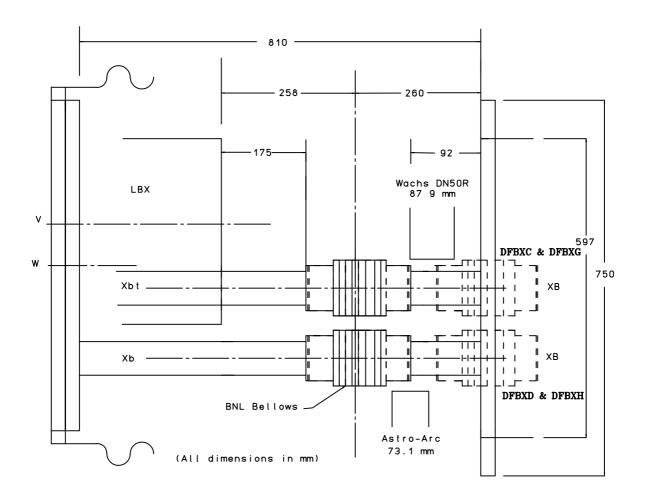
XB Pumping Line Interconnection Layout
